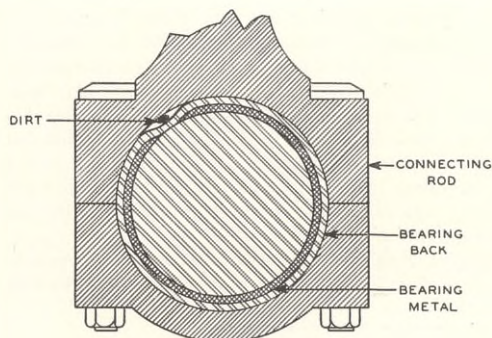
This dirt particle, larger than the thickness of the oil film, will cause heating
